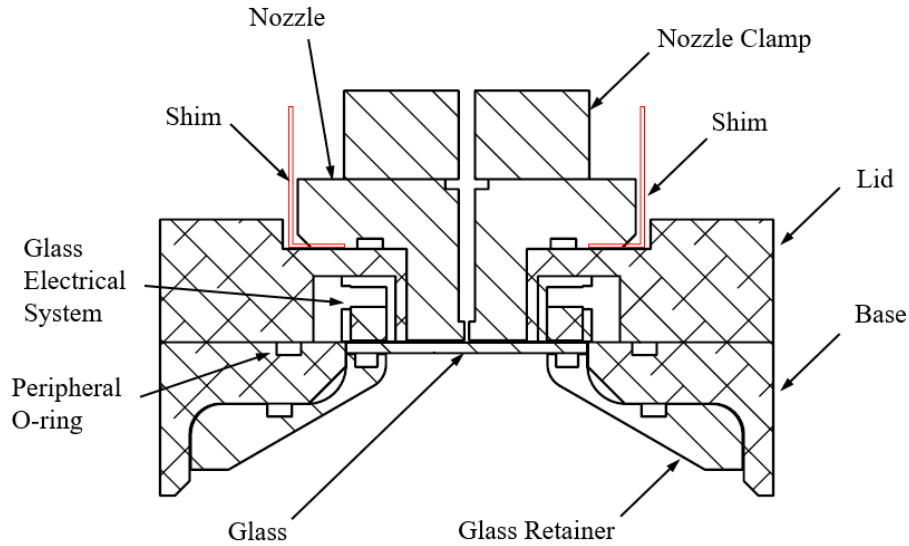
Section view through test section, only showing cut surfaces, showing location of shims when nozzle is raised.
